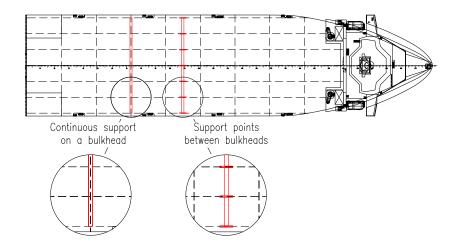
Beam support arrangements for transverse loading between bulkheads and on top of a bulkhead
